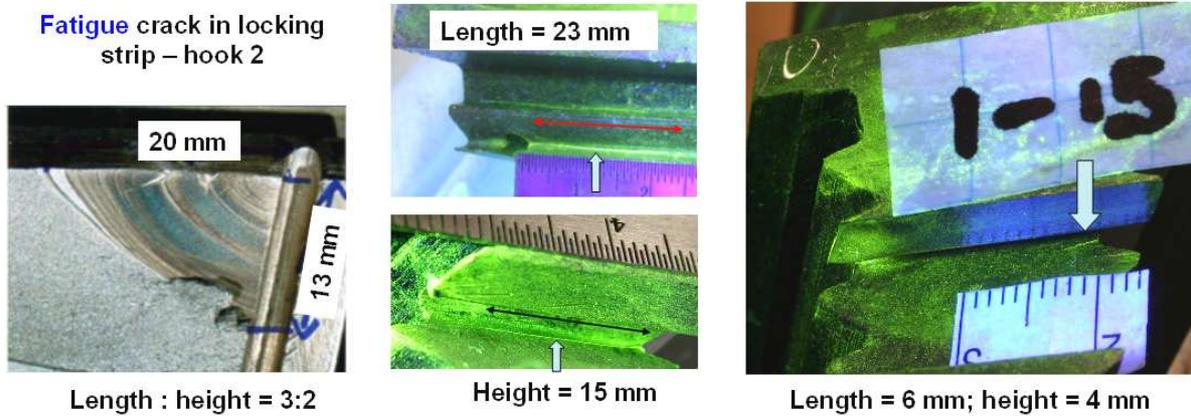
Crack locations on concave side confirmed by fracture mechanics on two blades.
